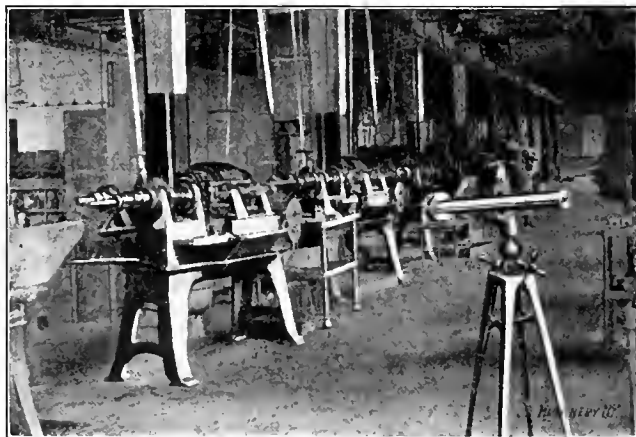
Battery of Automatic Screw Machines which make the Tool-holder Set-screws
